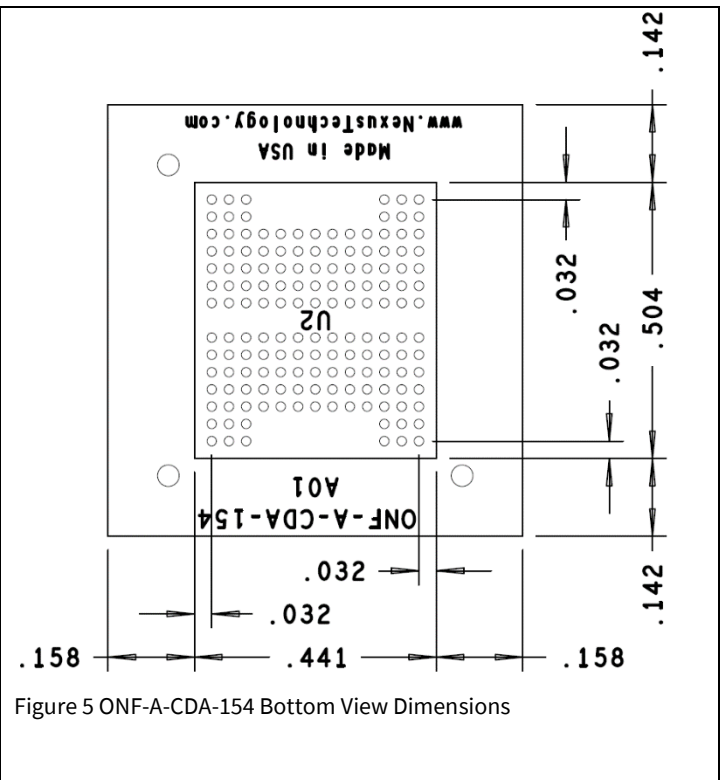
ONF-A-CDA-154 Bottom View Dimensions
